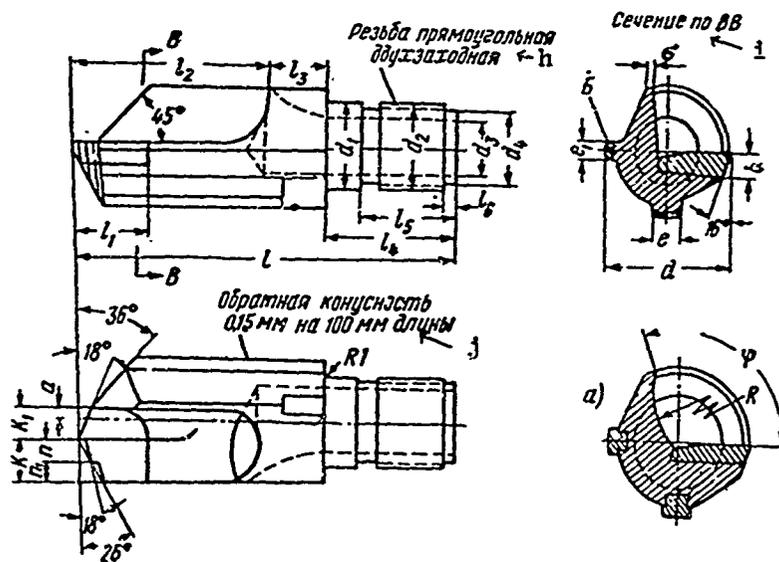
One-sided cutting drill (scraping) with hard alloy blade
